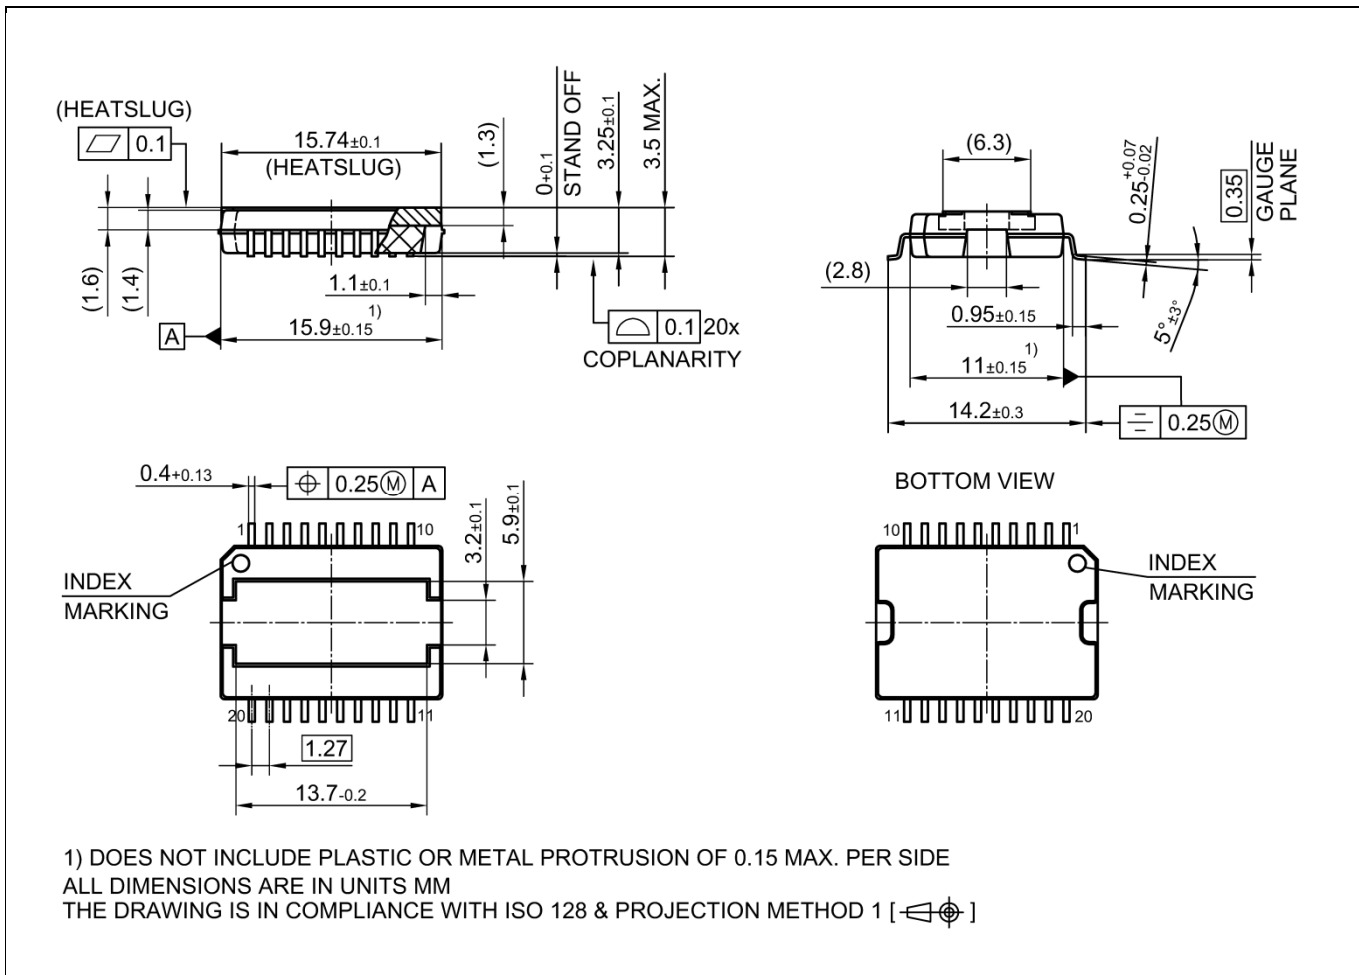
PG-DSO-20-87 Package Outline, dimensions (mm)
